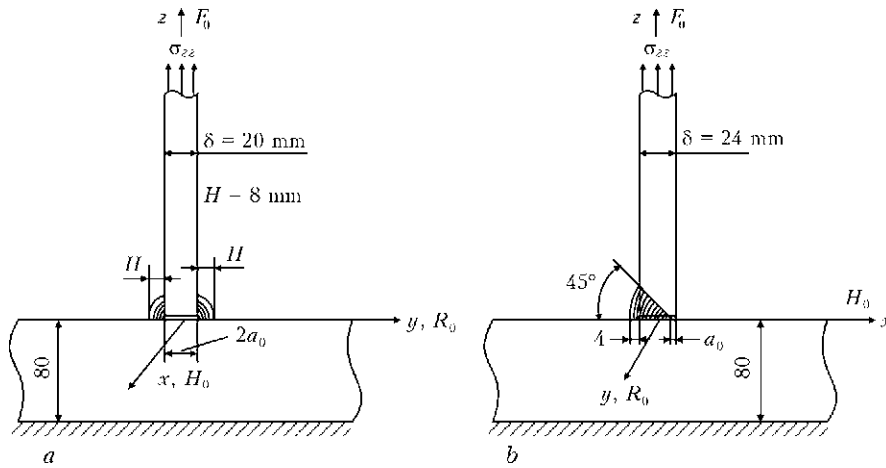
T-joints with fillet welds considered: a – T3; b – T6
